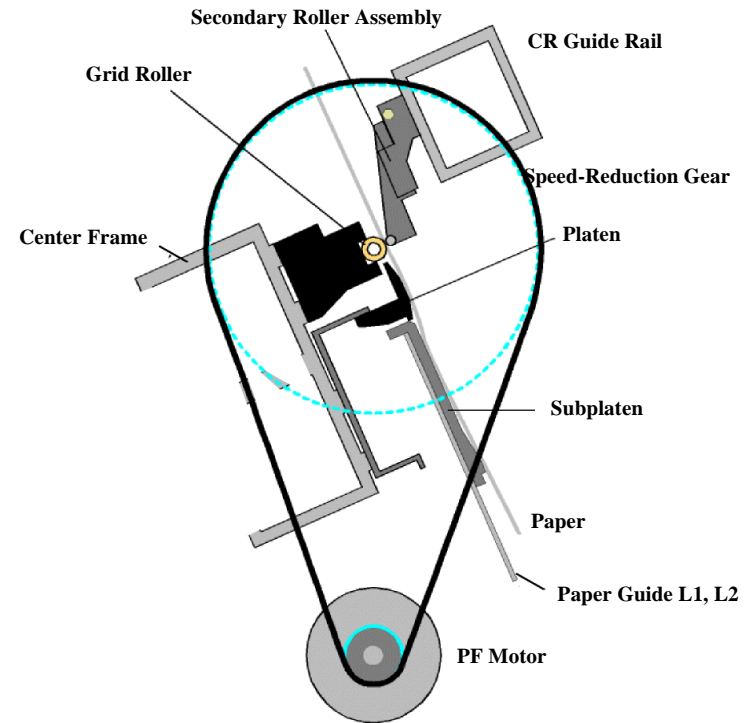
Paper Feed Mechanical Unit PF Rail Unit
